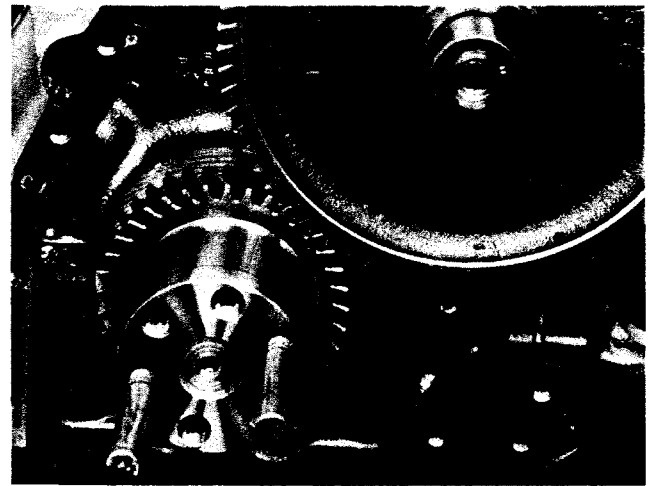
, (N114255). Timing marks on camshaft and crankshaft
